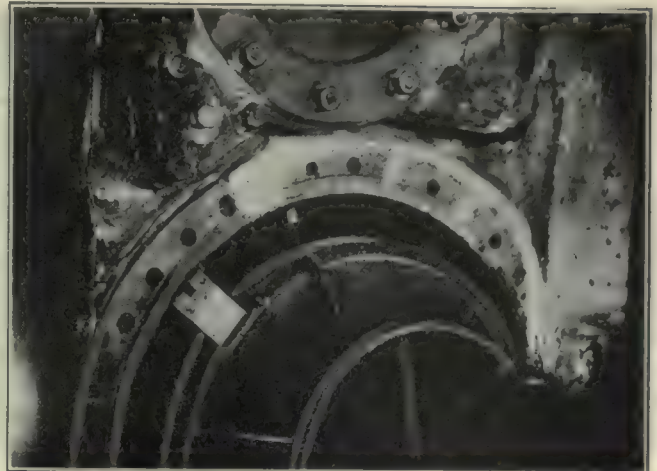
REPAIRING CRACKED FLANGES OF CYLINDERS
